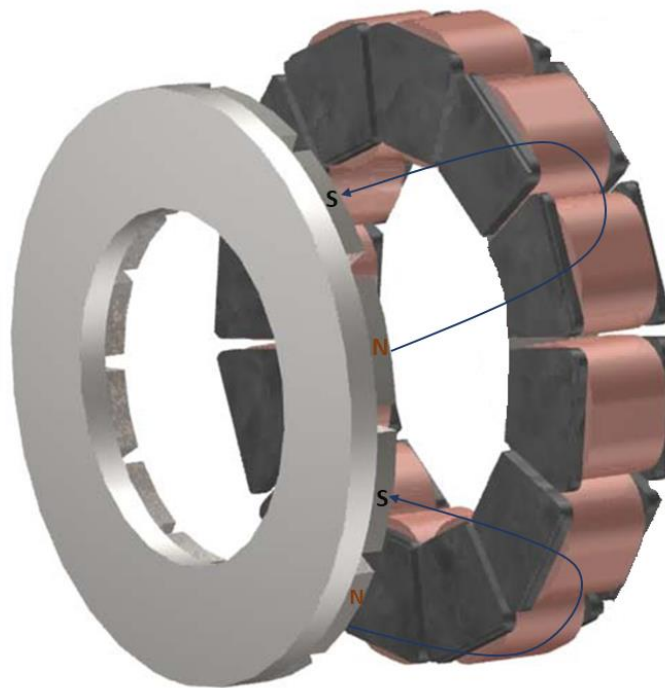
Direction of magnetic flux lines for a single rotor motor (or equivalent of a fully actuated double rotor machine) ^[81]
